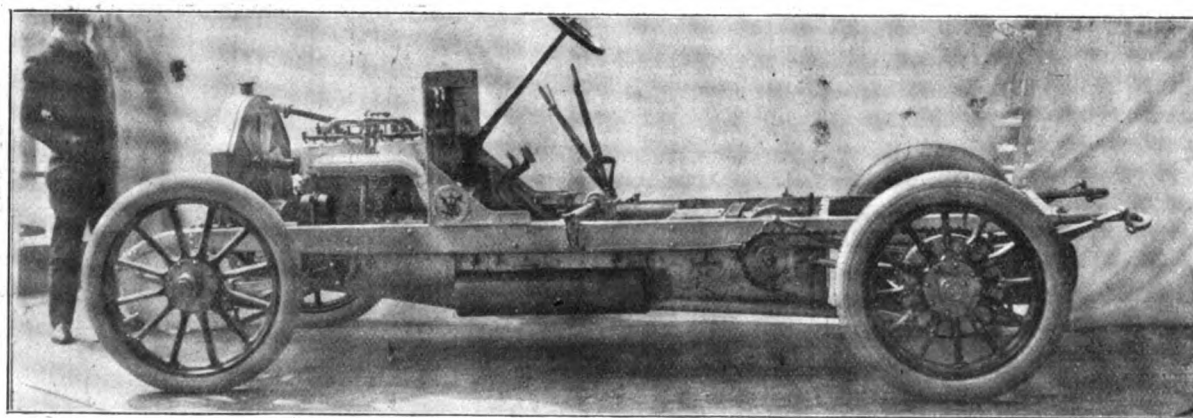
Chassis of Westinghouse 35-40-h.p. Car.
